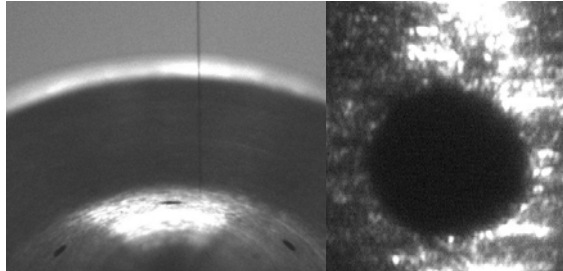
Image of a fuel injector with standing wave probe located adjacent to the hole (left), and view of the hole entrance (right).
